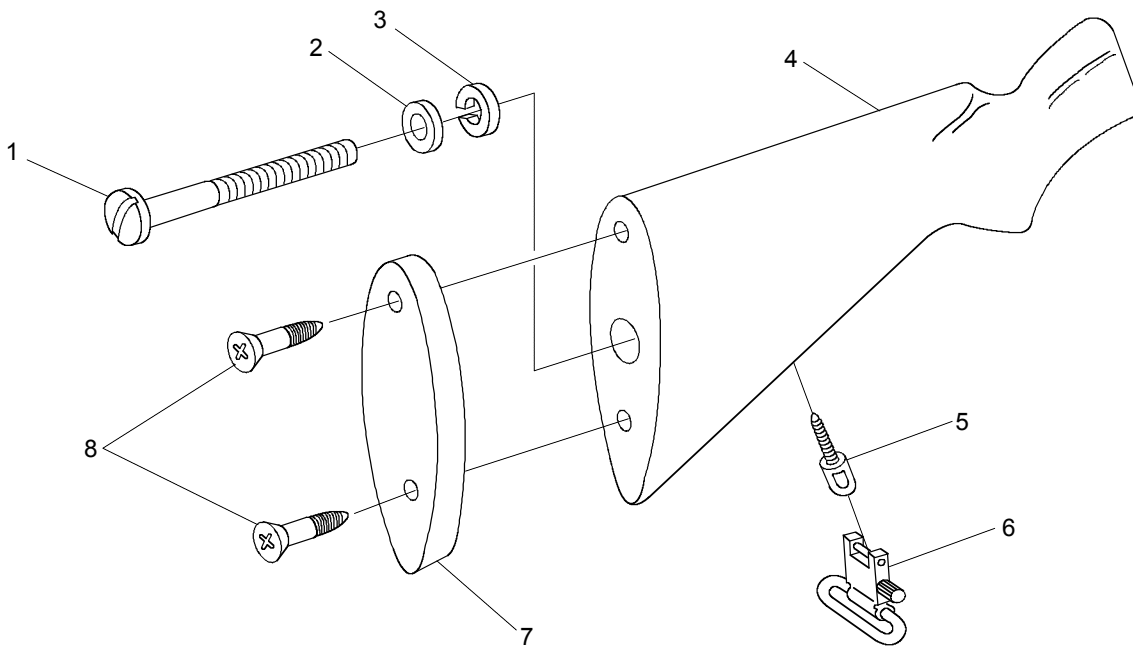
Stock, Gun, Shoulder, P/N 14762MIL
